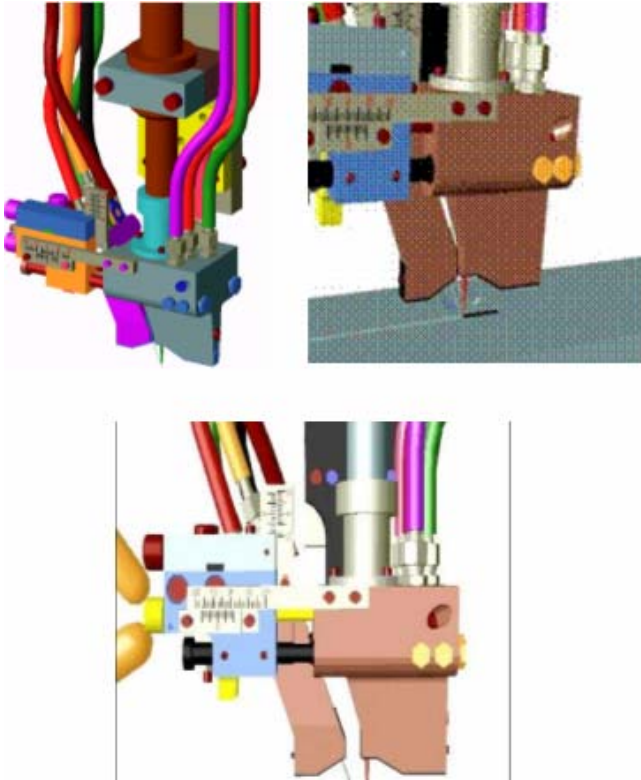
Narrow Gap Hybrid welding tool prototype
